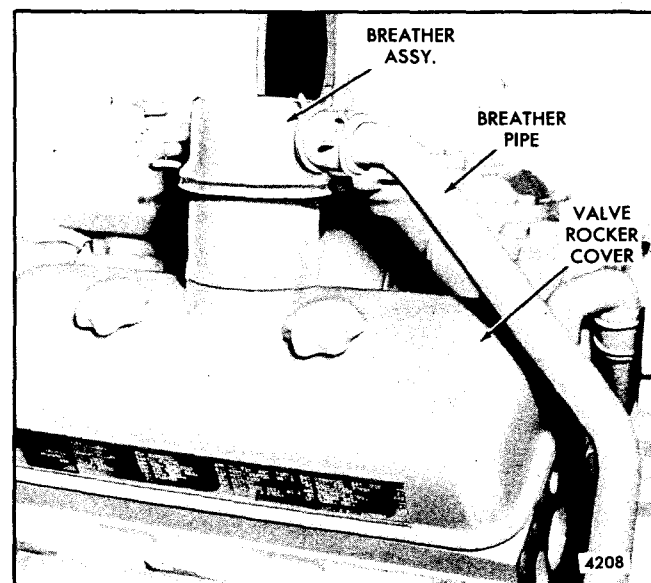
Typical Mounting of Breather Assembly on Valve Rocker Cover
